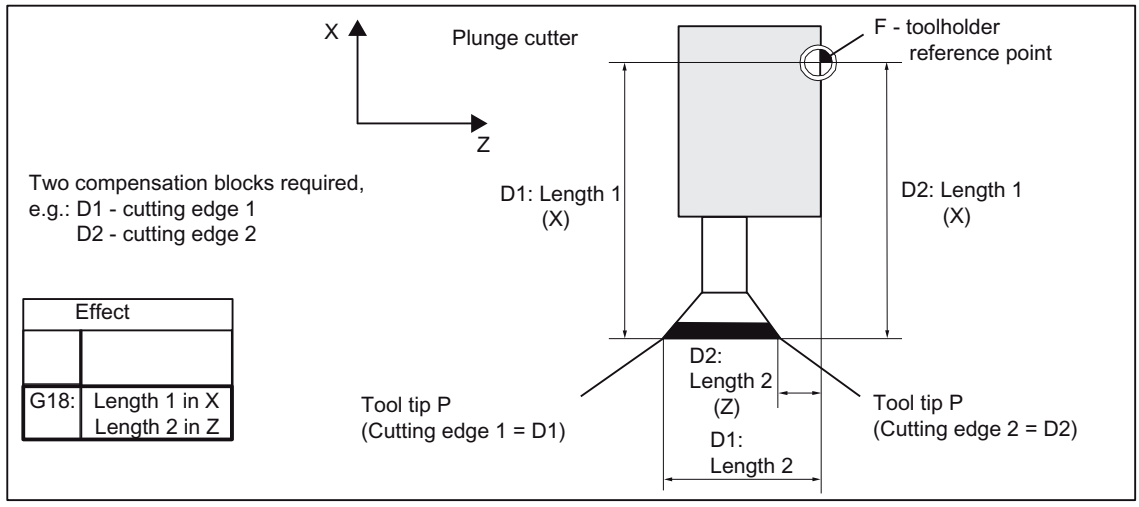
Turning tool with two cutting edges D1 and D2 - Length compensation
